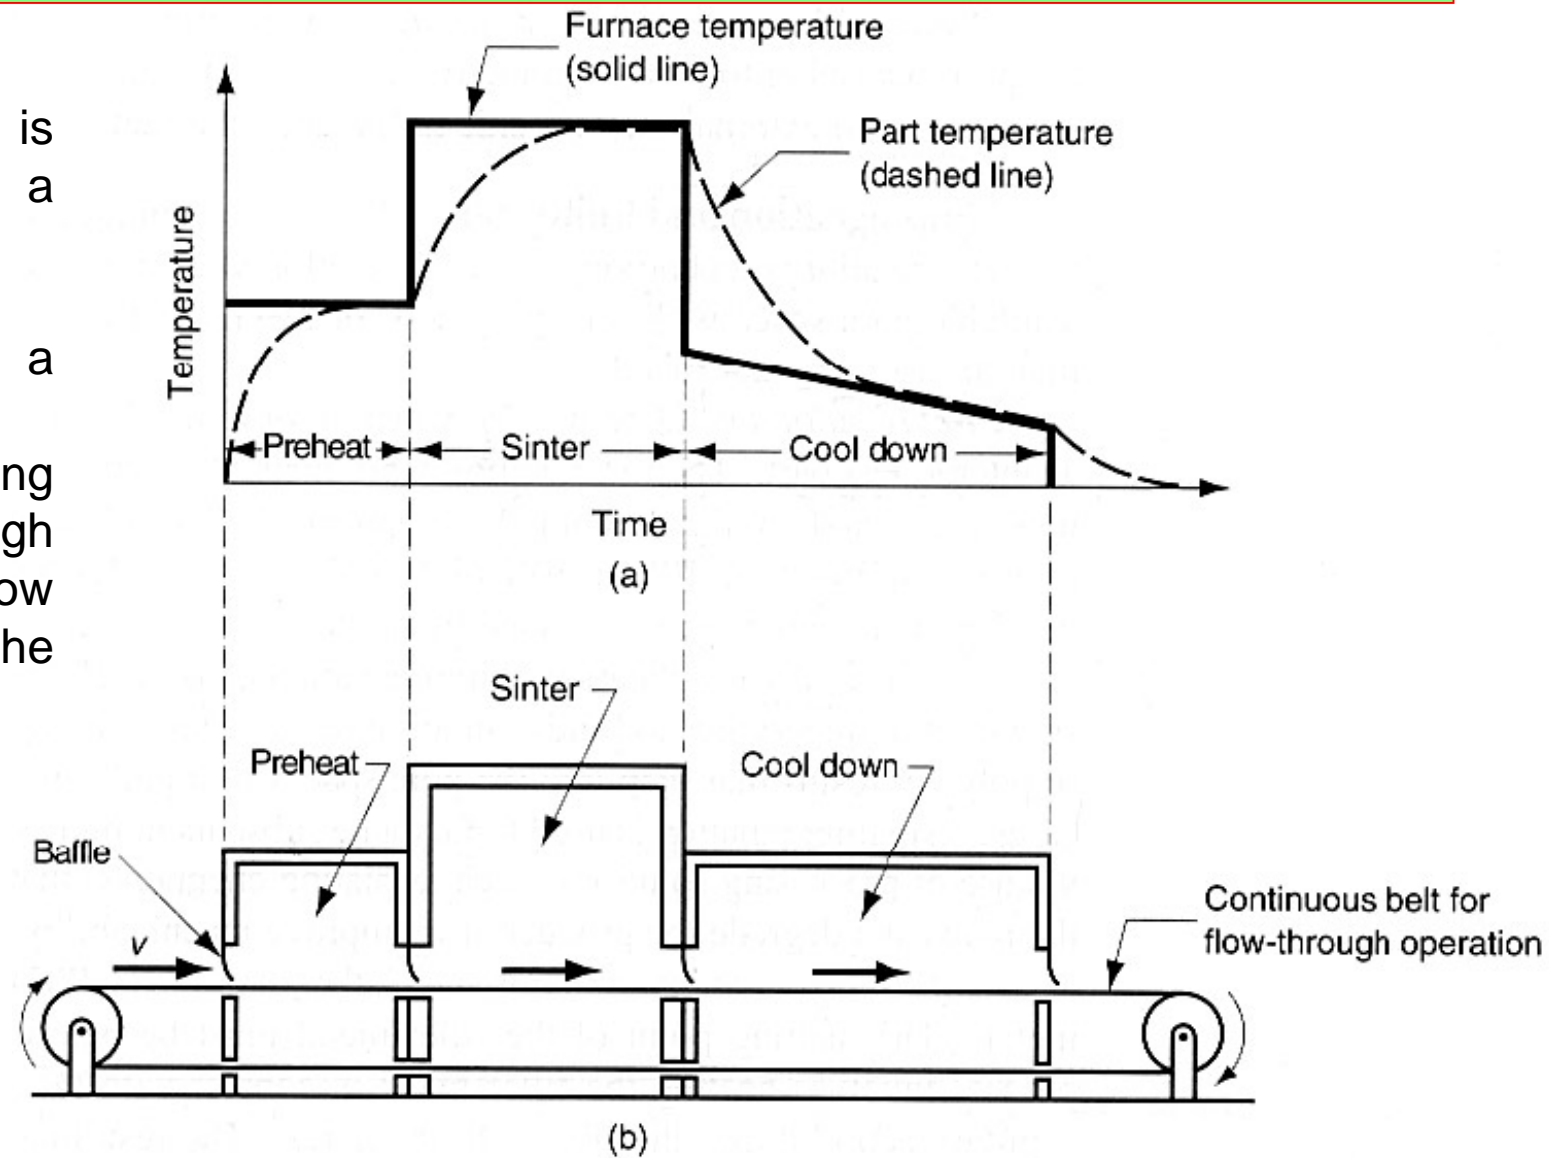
(a) Typical heat treatment cycle in sintering; and (b) schematic cross-section of a continuous sintering furnace
